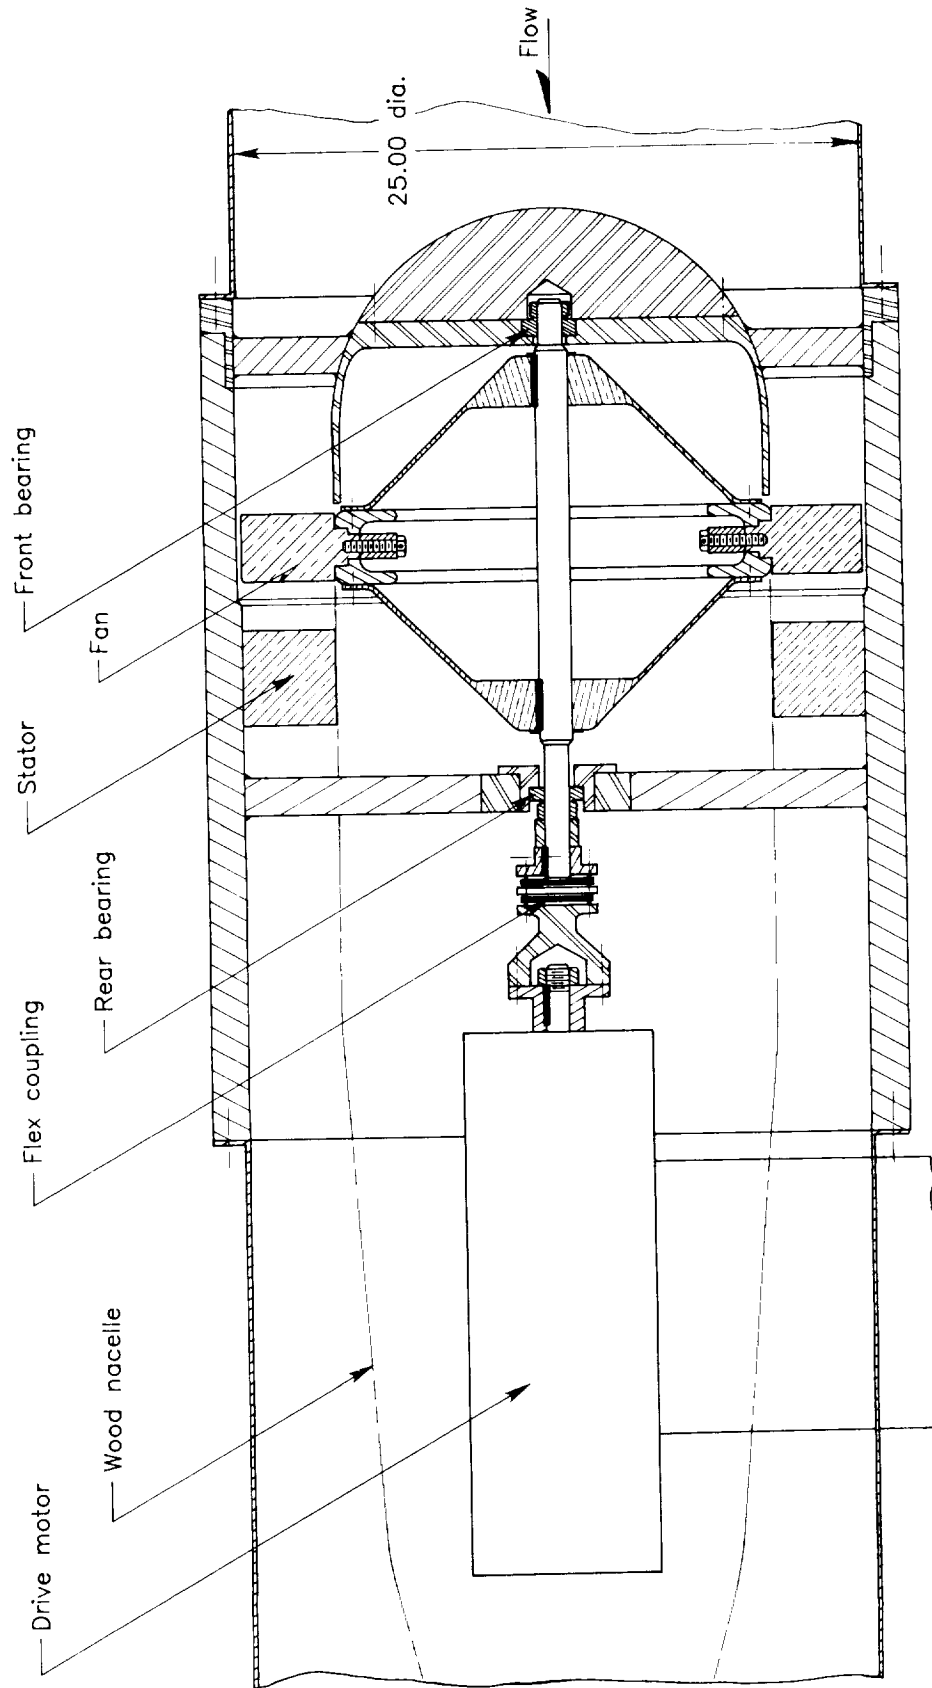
Schematic drawing of drive fan installation. Dimensions are in inches.
